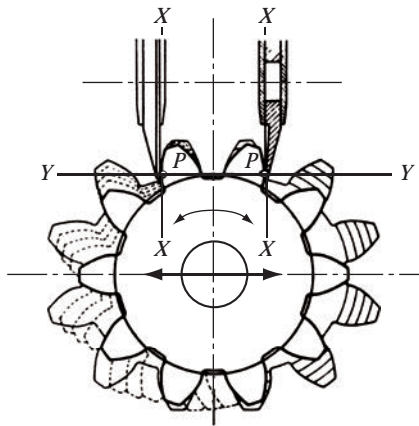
Zero-degree pressure angle grinding with saucer wheels. (Courtesy of Maag Gear Wheel Col, Zurich, Switzerland.)
